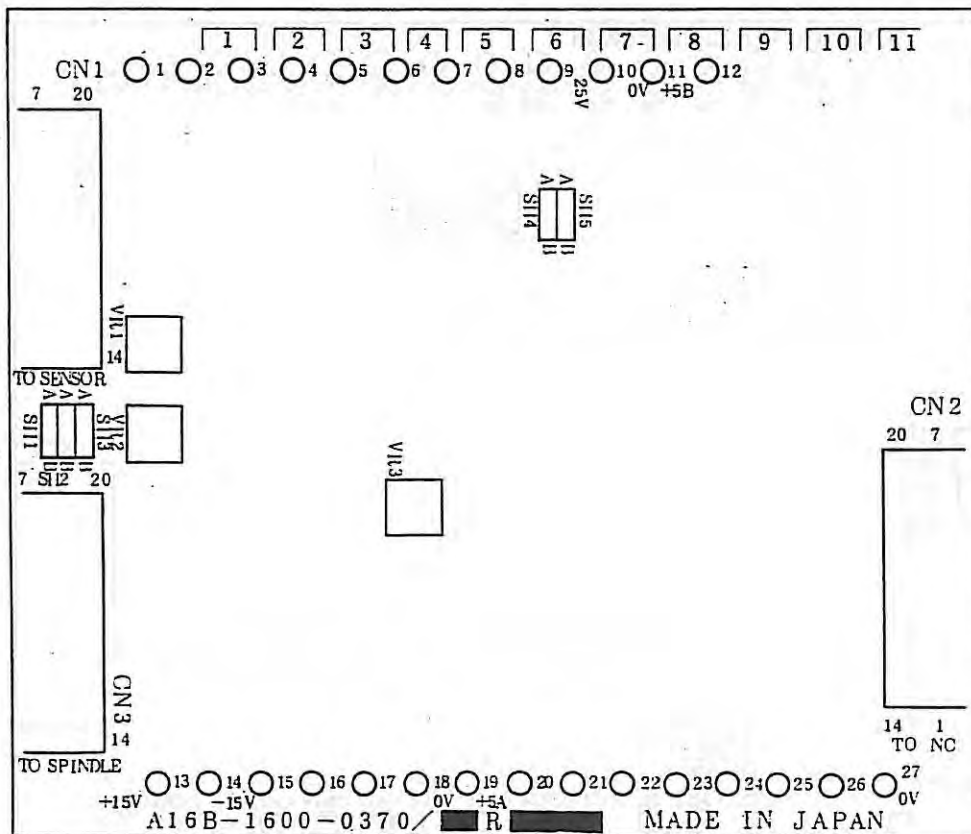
(b) Mounting positions for jumper, variable resistors and test points printed circuit board drawing No.: A16B-1600-0370
